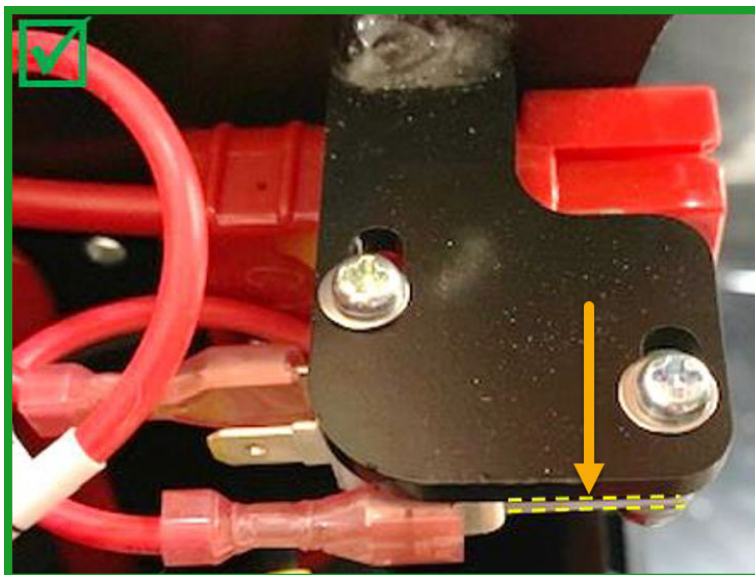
Correctly mounted microswitch with body parallel to the mounting plate edge
